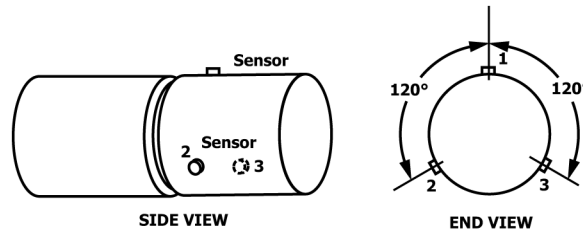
Typical Sensor Placement for Three-Channel AE Monitoring of a Circular Weld
